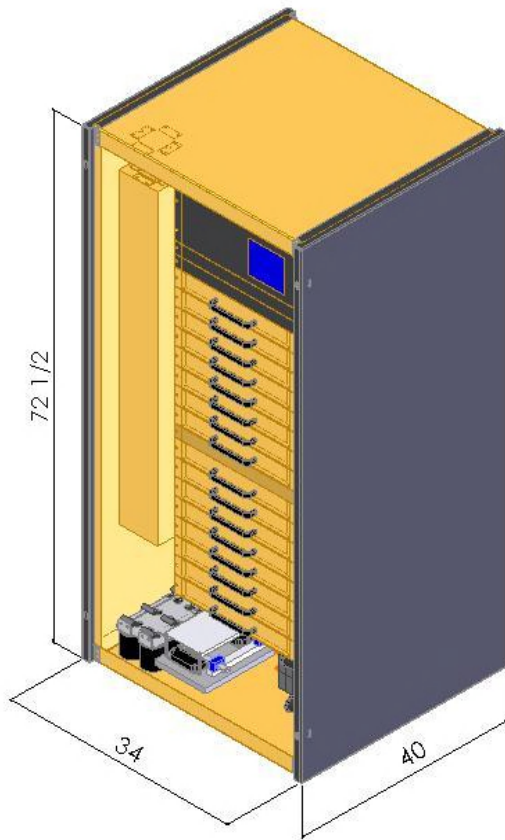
Concept Drawing of Water-cooled 40 kW Transmitter (Heat Exchanger not shown)
